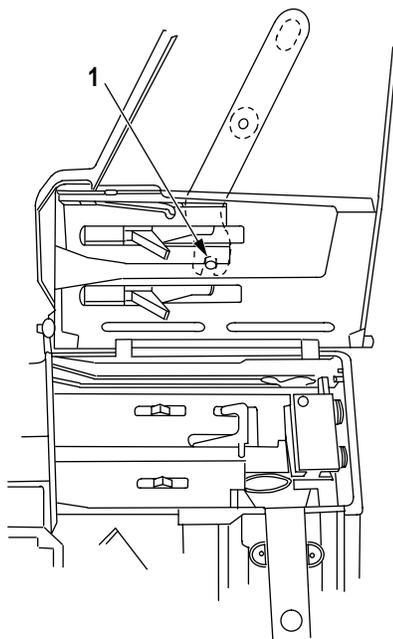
Secondary Drive Lever Assembly (Fixed or Adjustable) Assembly.
